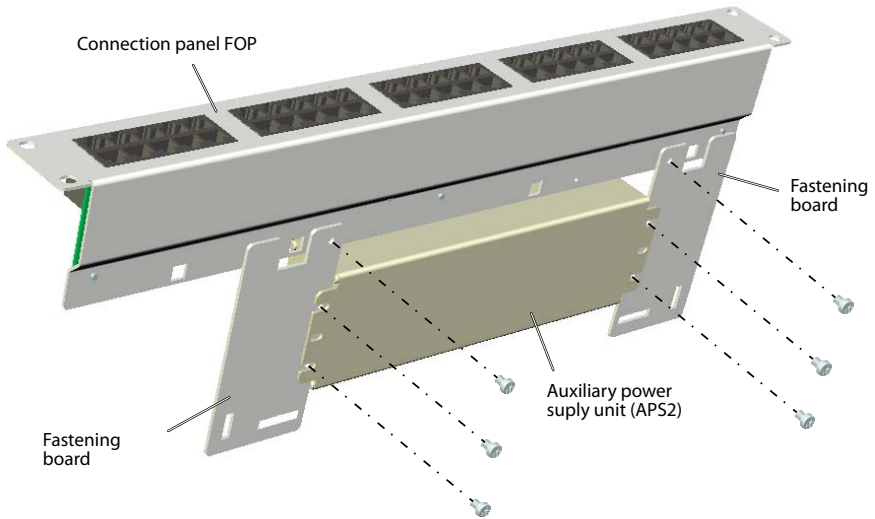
Fan-out-panel with auxiliary power supply fitted (viewed from below)
